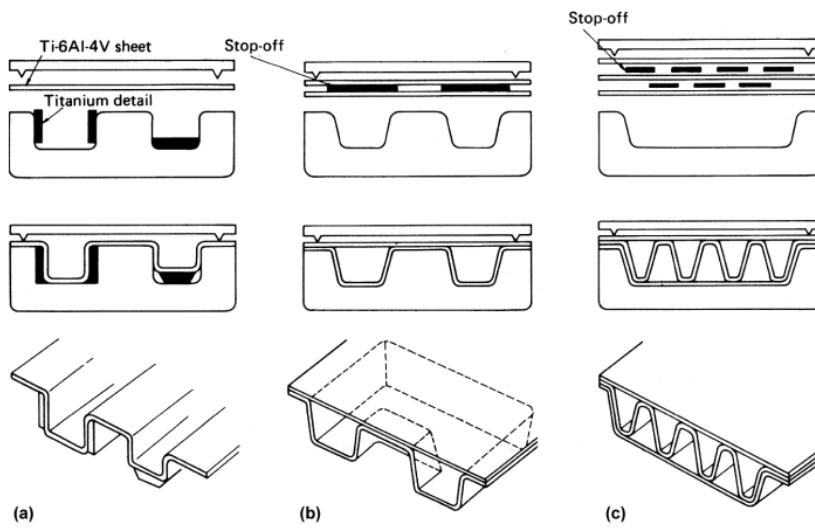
Basic shapes of superplastically formed, diffusion-bonded structures. A) Reinforced sheet; one sheet. B) Integrally stiffened structure; two sheets. C) Sandwich; multiple sheets. (Titanium: A Technical Guide, fig.9.14, p.77)
